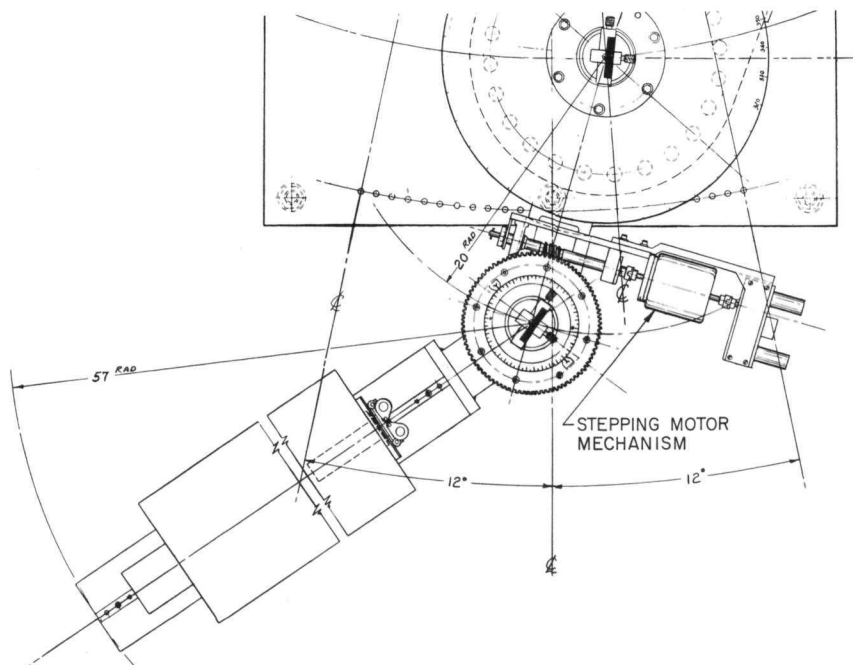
Top View of Spectrometer II Showing $\Delta\lambda$ Mechanism.
